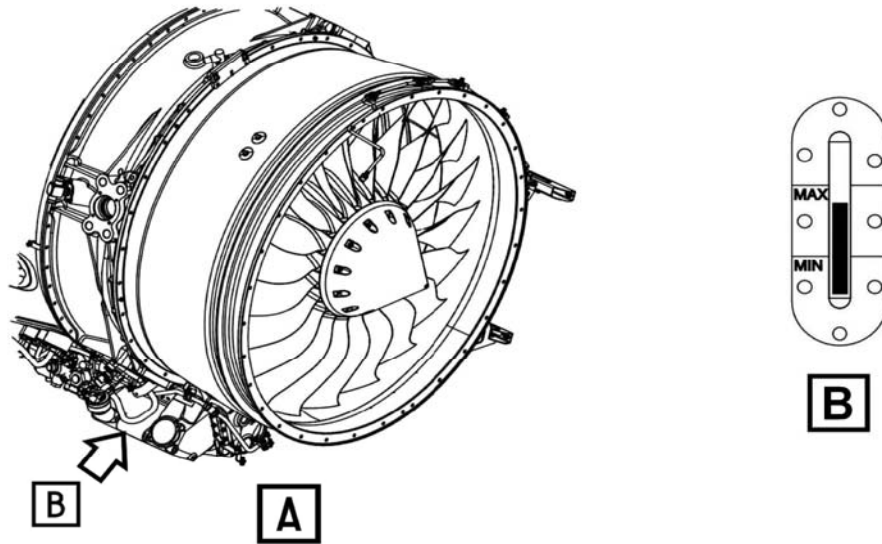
ENGINE 1 AIR TURBINE STARTER VALVE
